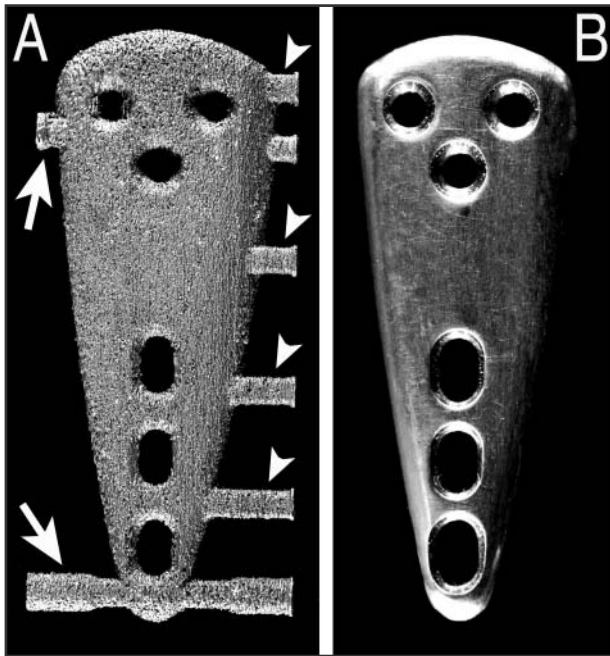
Photographs of a custom plate immediately after EBM fabrication (A) and after the plate was finished by use of CNC machining (B). Notice the rough surface of the custom plate before CNC machining. Four pegs (arrowheads) are used for plate support during EBM fabrication, and 2 pairs of opposing pegs (arrows) are used to secure the plate during CNC machining.
